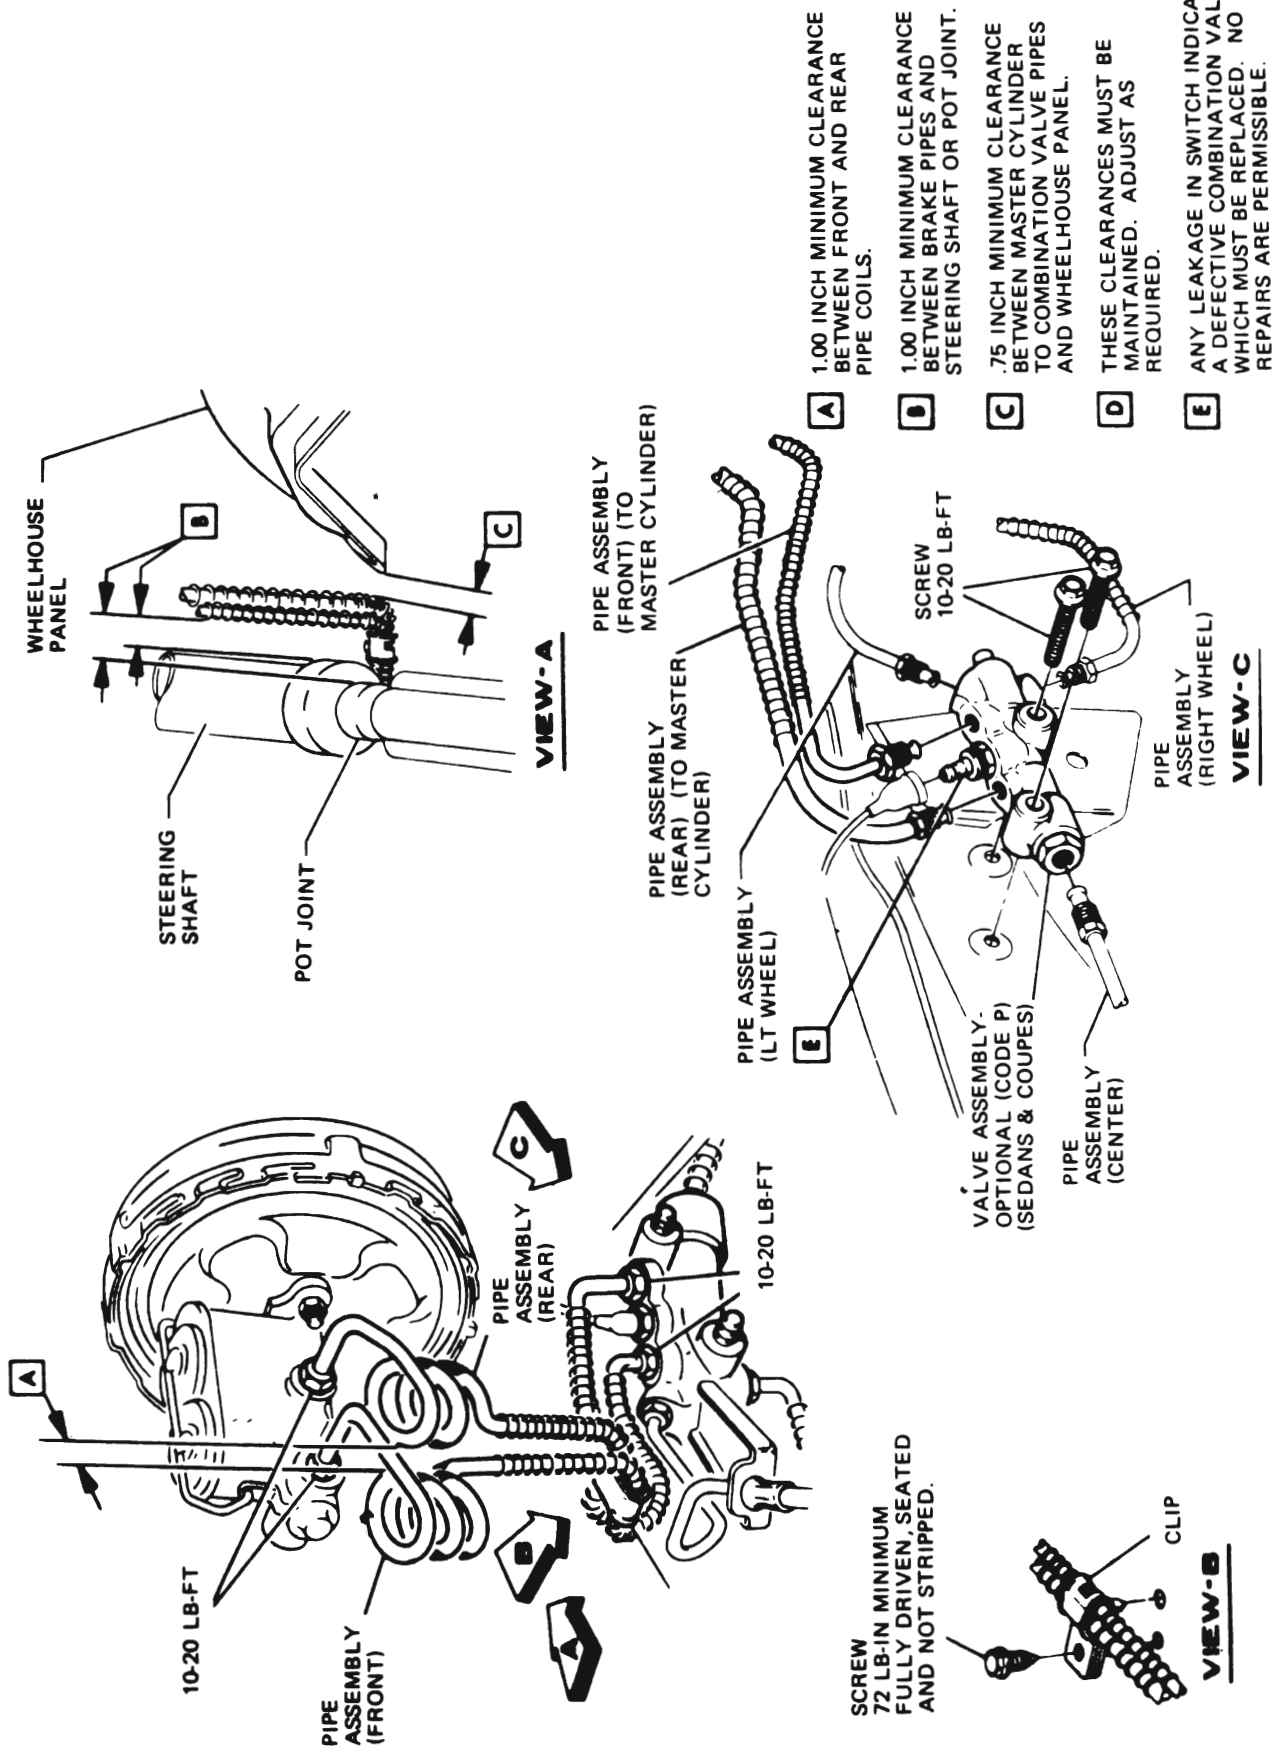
C-11 Brake Lines - Master Cylinder to Combination Valve - B-C-E Car
